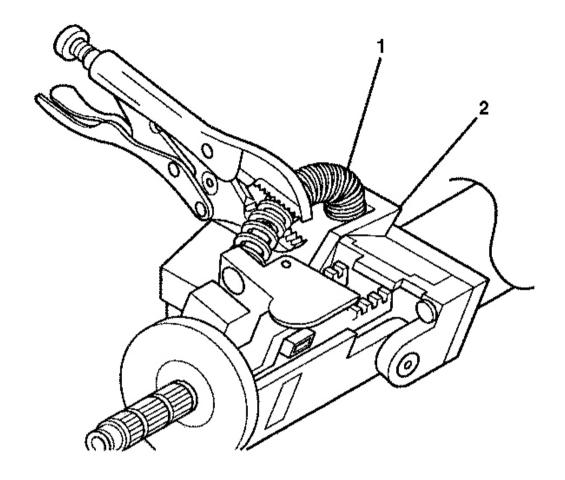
Installing Tilt Spring Courtesy of GENERAL MOTORS CORP.
